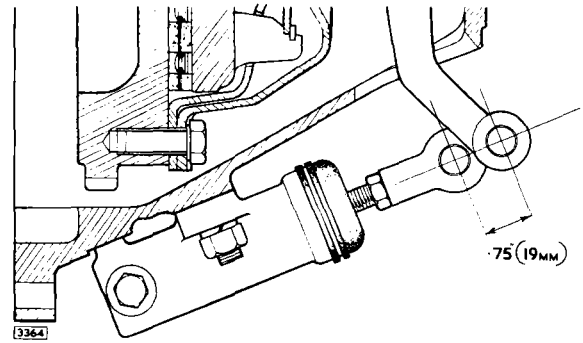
Setting dimensions for refitting hydrostatic slave cylinder.
